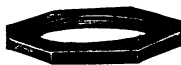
Lock nut and bushing for iron-lined panel boxes.
